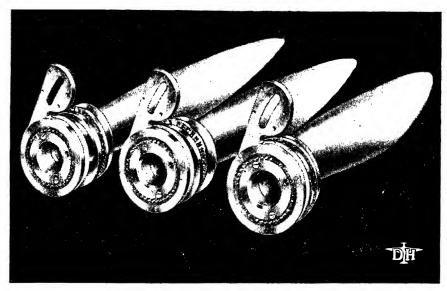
Counterweight brackets mounted on blade ends showing base-setting adjustment and thrust races
